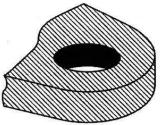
Main rotor hub mechanical and corrosion damage limits (sheet 2)
